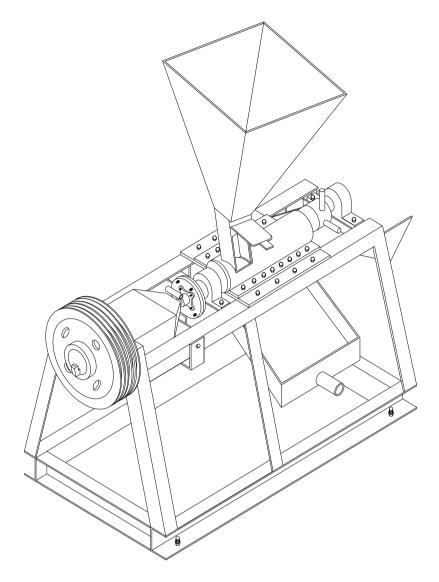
Isometric Projection Of The Palm Kernel Oil Expeller
